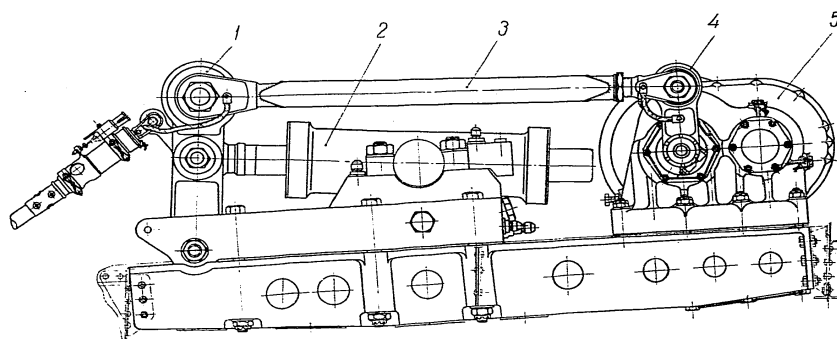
MOUNTING HYDRAULIC BOOSTER WITH STEP-UP GEAR
